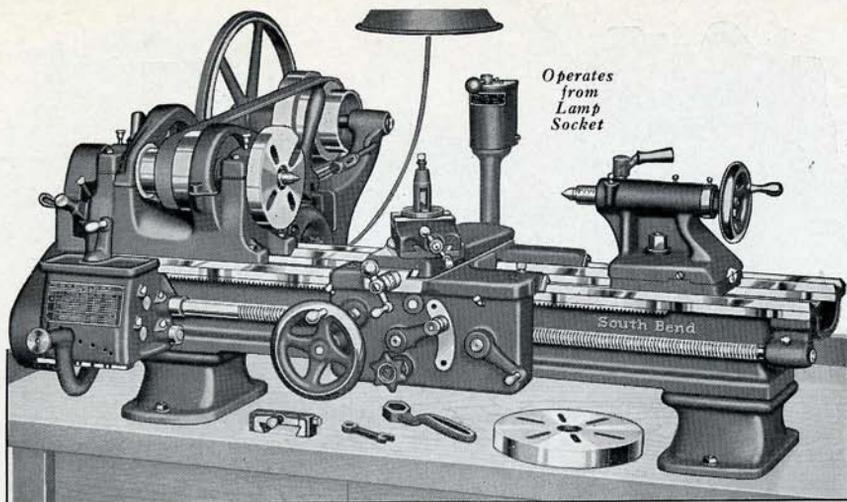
Cat. No. 409-YN, 9"x3' Horizontal Motor Drive Quick Change Gear Bench Lathe complete as shown, but less bench.....\$333.00
